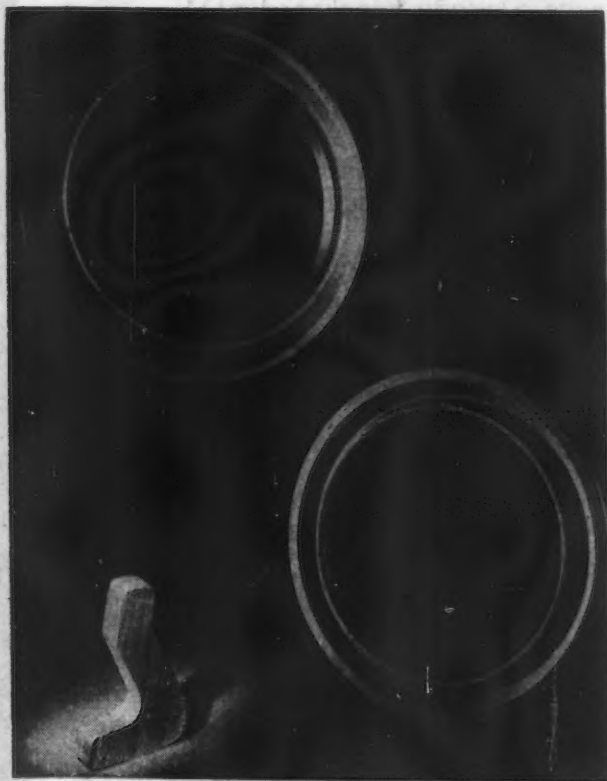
By using a special section subsequent expensive machining was materially reduced for the supercharger outlet flange rings; 16 in. OD x 11 13/16 in. ID x 1 3/16 in. deep, 27/64 in. average thickness.
